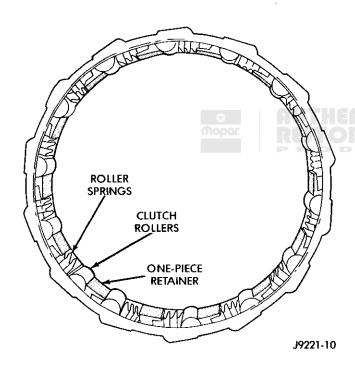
Clutch Roller, Spring And Retainer Assembly
